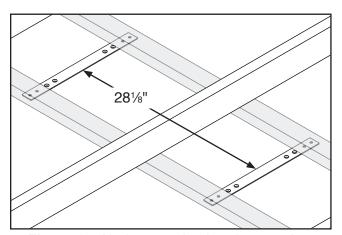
Undermounting brackets against mounting boards (mounting boards greyed out for clarity).
